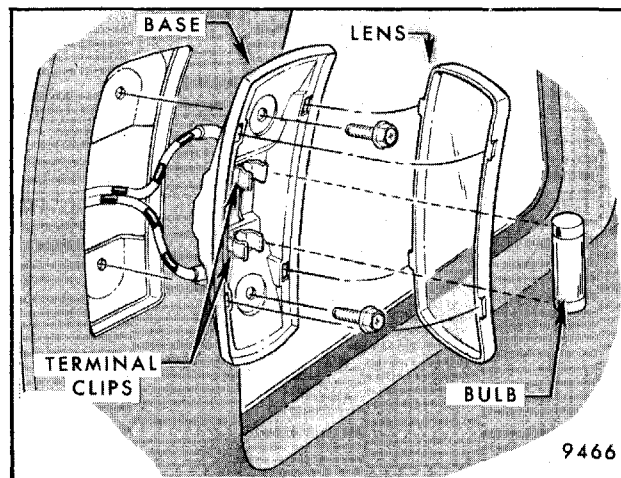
Rear Quarter Upper Trim Courtesy Lamp - "A" Body Styles
